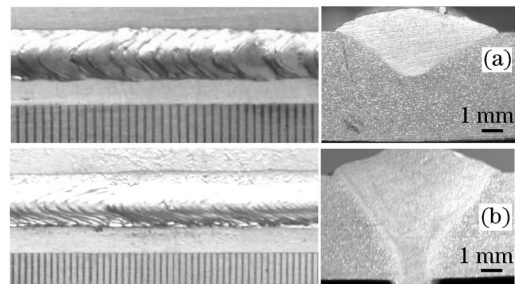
Weld appearance and cross-section of hybrid welding at different shielding gas pressures of 0.06 (a) and 0.25 MPa (b). $P = 1700$ W, $I = 100$ A, $D_{LA} = 2.0$ mm.
